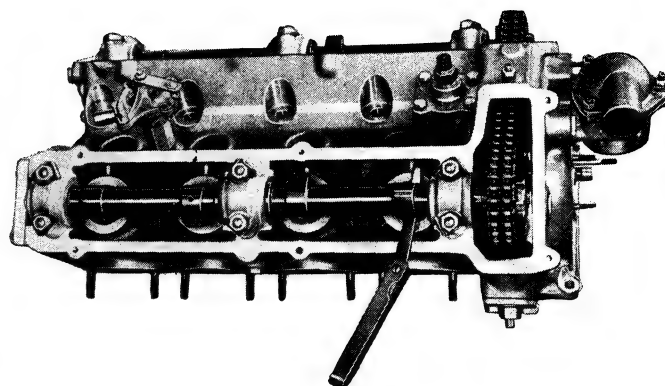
Checking tappet clearance on engine 118 B.000 by means of feeler gauge A. 95113.
